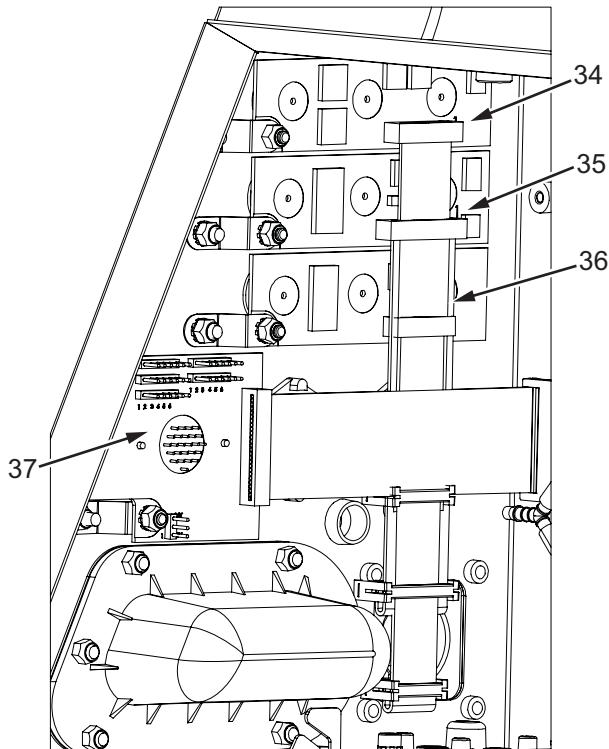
PCB 1,2,3 and 4 Assemblies
